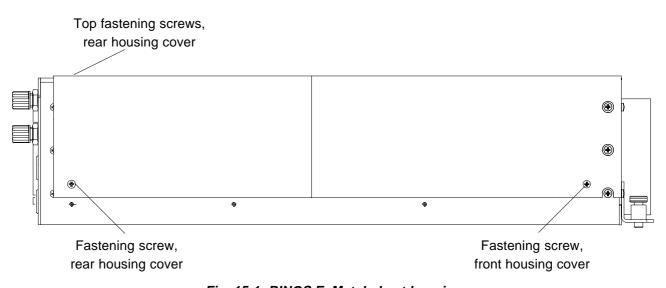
BINOS E, Metal-sheet housing (Fastening screws housing cover)
